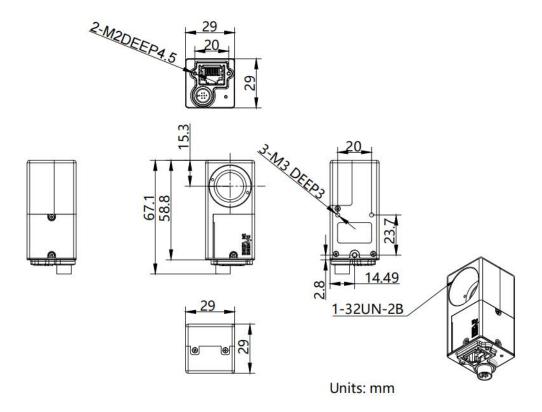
MER2-G-W90-S90 mechanical dimensions
